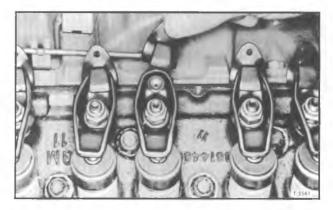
Use of Oil Deflector Clips on In-Line and V8 Engines
